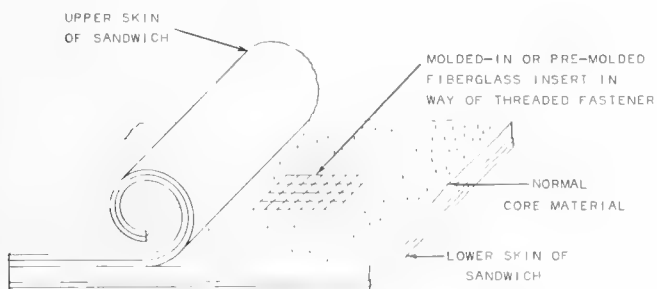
Fiberglass Insert for Threaded or Bolted Fastener in Sandwich Construction
